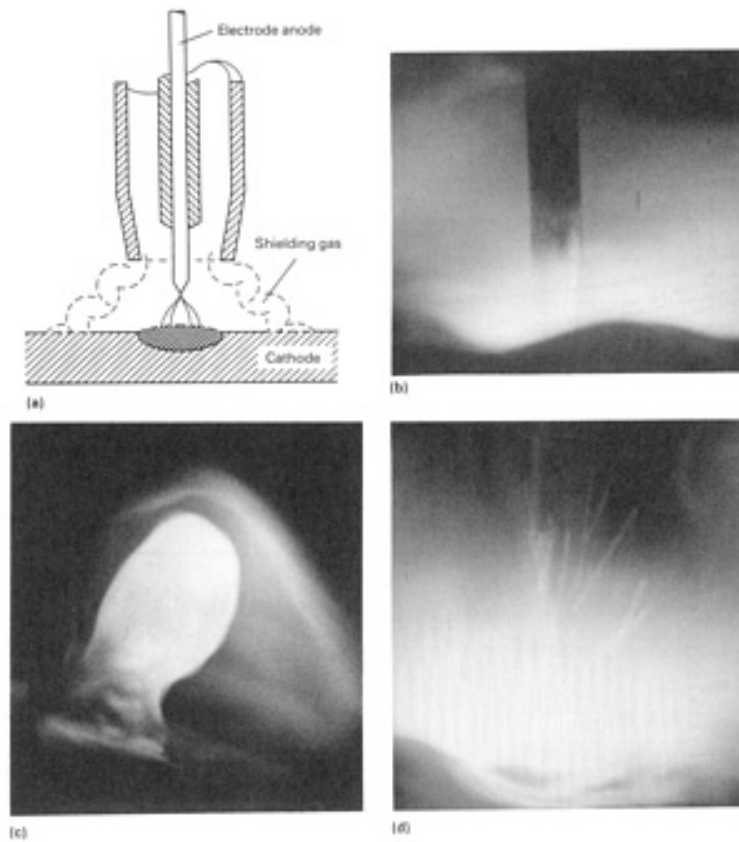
SHORT-CIRCUITING TRANSFER MODE IN GAS-METAL ARC WELDING OF STEEL. (A) SCHEMATIC SHOWING TRANSFER OF ELECTRODE MATERIAL BY SURFACE TENSION OF WELD POOL ONTO CATHODE BASE METAL. (B) HIGH-SPEED PHOTOGRAPH OF MATERIAL TRANSFER WHEN ARC LENGTH IS VERY SHORT. (C) HIGH-SPEED PHOTOGRAPH OF CYCLIC SHORTING OF ARC BY THE ELECTRODE DURING METAL TRANSFER TO WELD POOL. (D) HIGH-SPEED PHOTOGRAPH OF VIOLENT ARC REIGNITION WITH ASSOCIATED SPATTER
